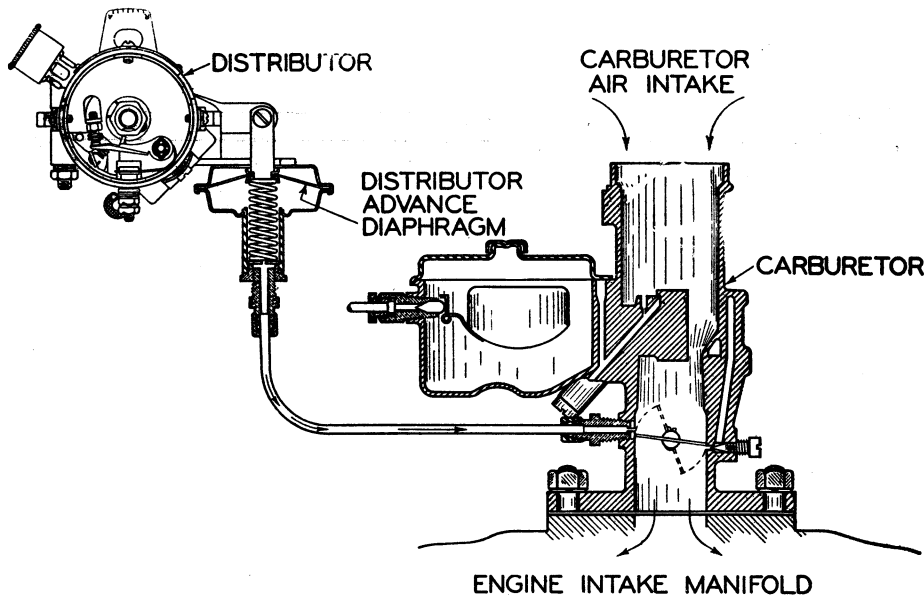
Auto-Lite vacuum advance mechanism of type clamped around distributor so that entire distributor is rotated as vacuum conditions change
